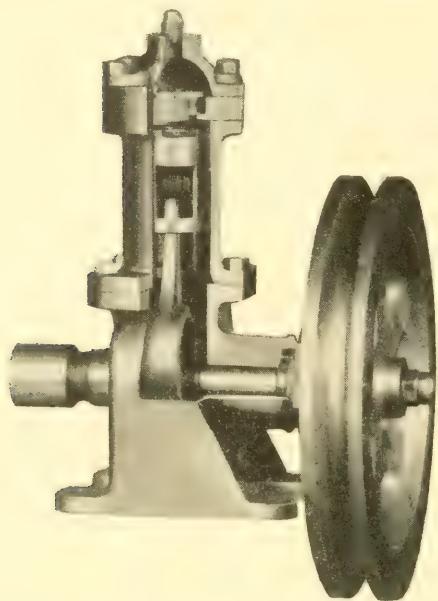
SECTIONAL VIEW OF ABSOPURE COMPRESSOR.
